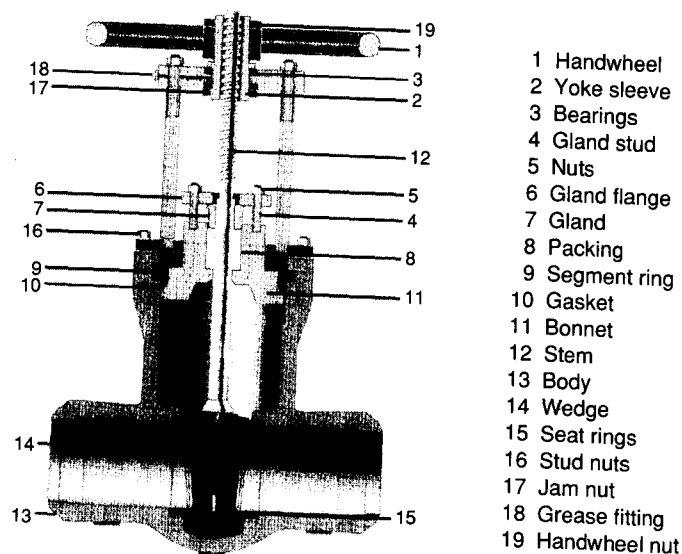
Rising-stem, pressure-seal bonnet, flexible-wedge disk, O.S.&Y. gate valve. Courtesy Crane Company.
